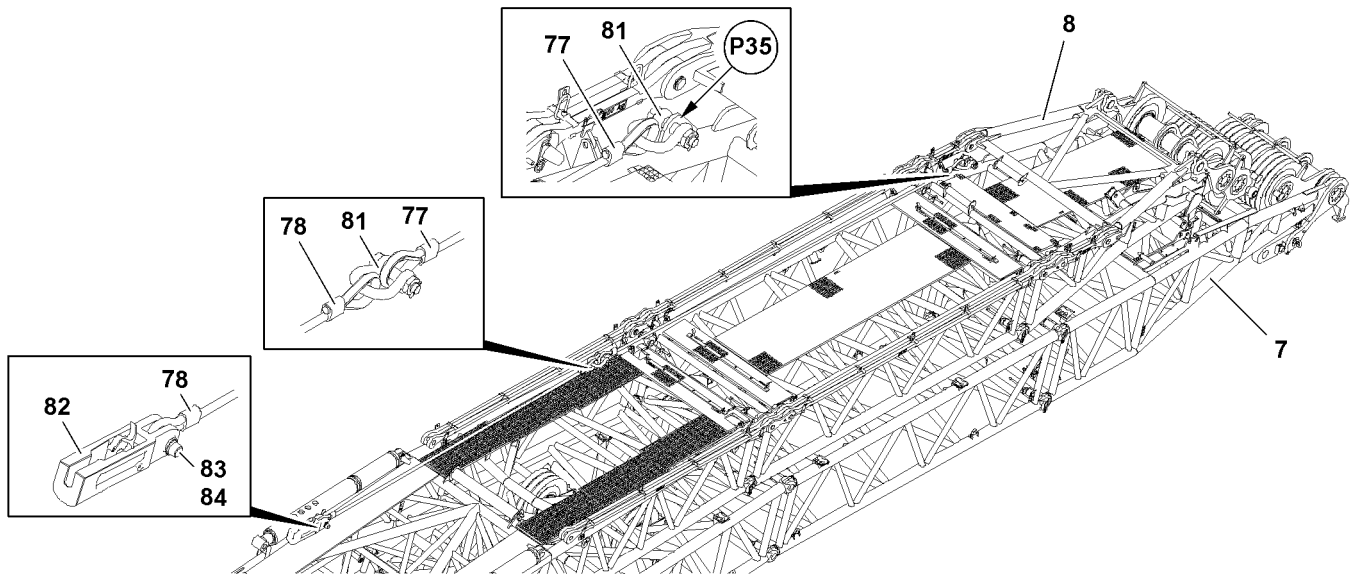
Install the assembly rope(s) for erection of the WA-frame 2 8 (example: long WA-frames)
